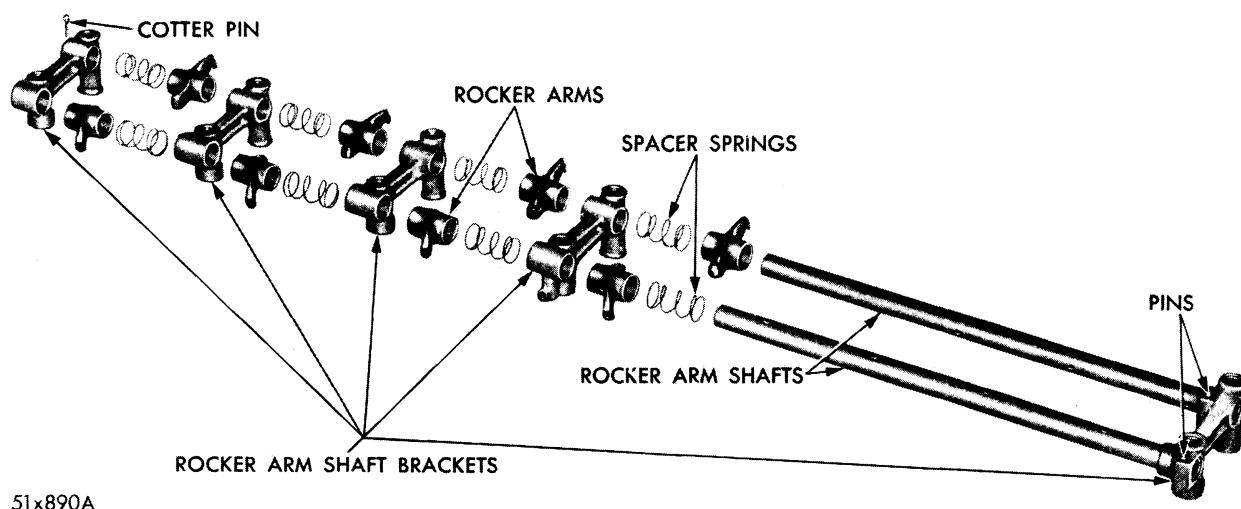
Rocker Shaft Assembly (Disassembled View) (FirePower)
